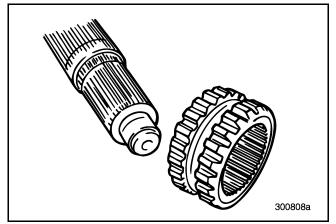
Installing First/Second Sliding Clutch onto Mainshaft
